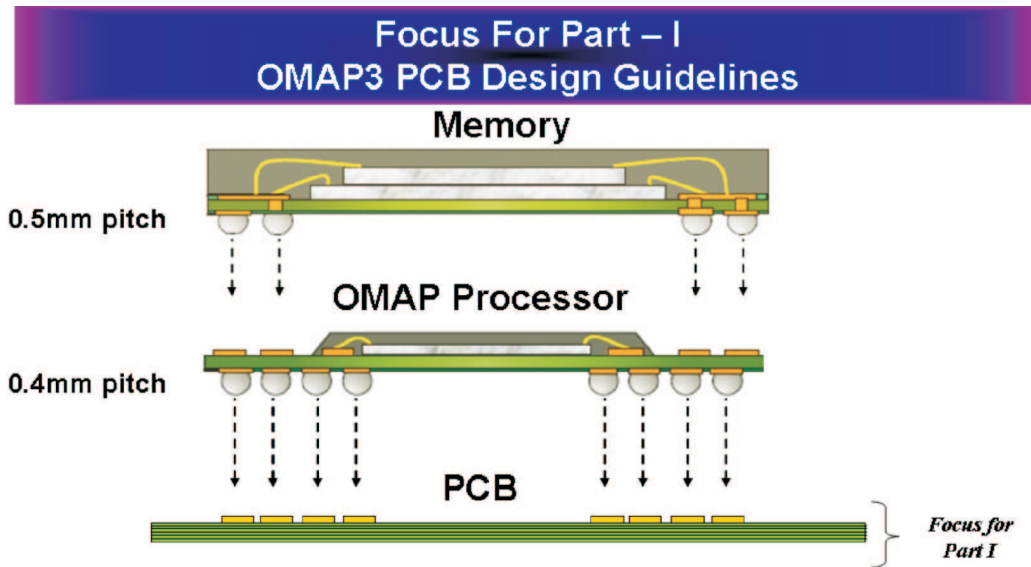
Part 1 - Focus for Part I - PCB Design Guidelines
